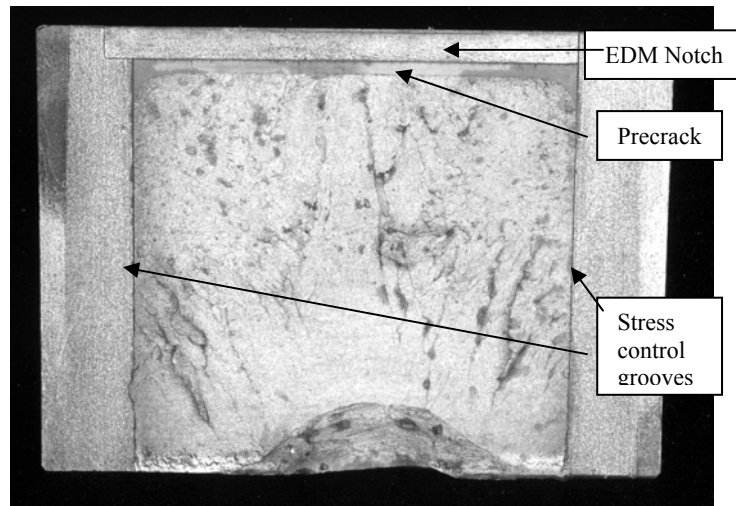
Fracture surface from a typical cruciform specimen test.
